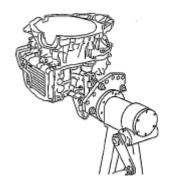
Identifying SST Courtesy of MAZDA MOTORS CORP.
